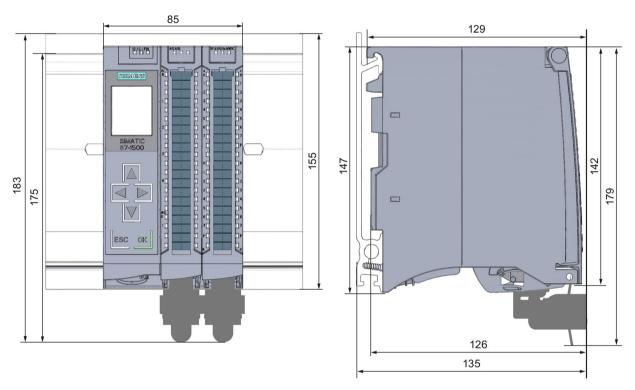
Dimension drawing of CPU 1511C-1 PN – front and side views
